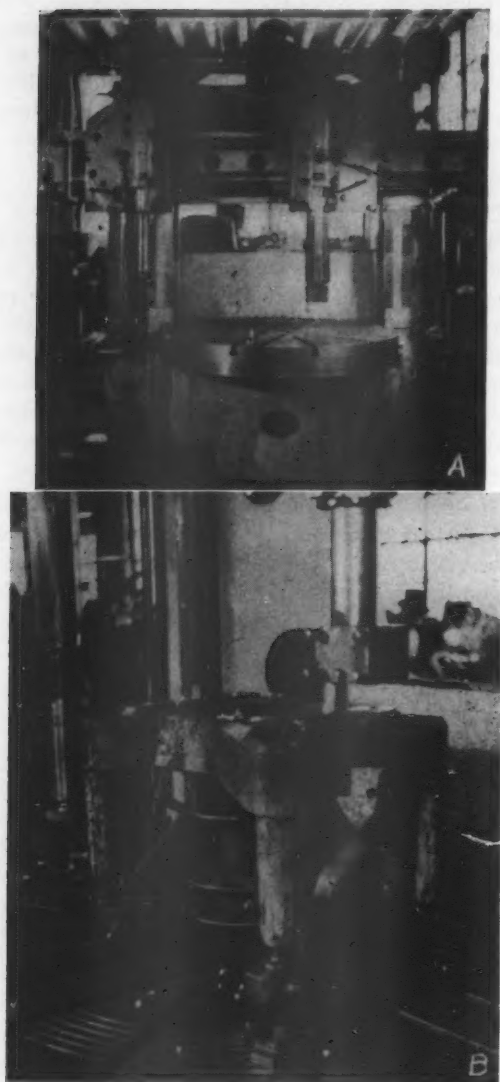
A—72-IN. BORING MILL FOR GRINDING AND BORING MOLDING MACHINE PARTS. B—EQUIPPED WITH VARIABLE SPEED GRINDING ATTACHMENT.
